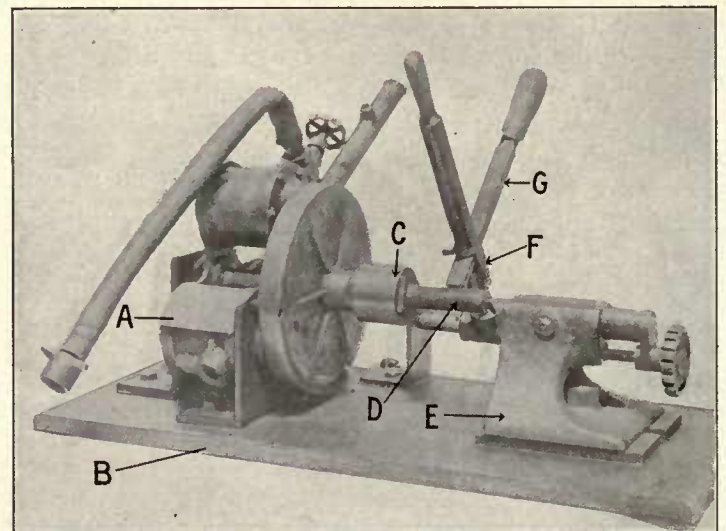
Pneumatic Lathe for Chasing Follower Bolts.
